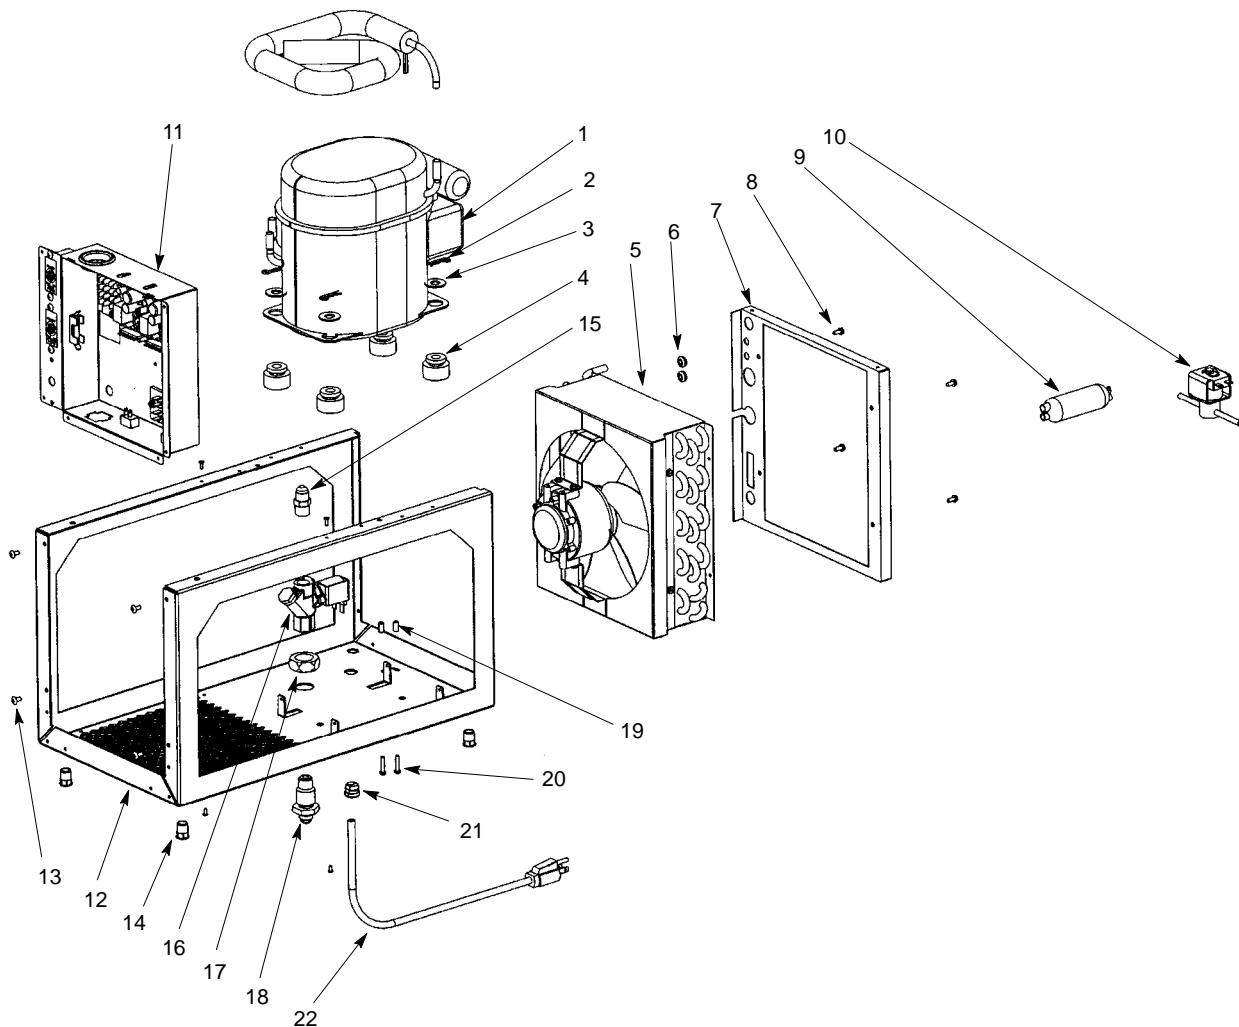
REFRIGERATION AND FRAME ASSEMBLY
